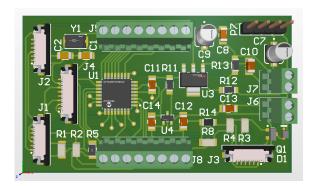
3D1 PCB 3: Main Gauntlet Board
